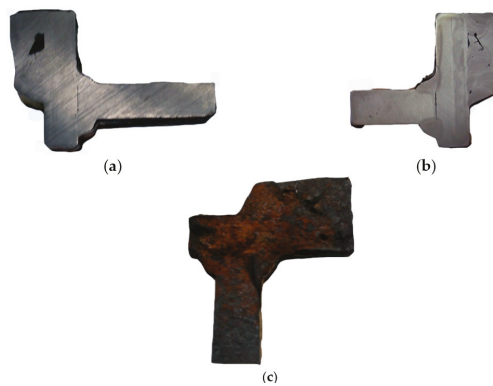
Macroscopic examination (handy-size bulk carrier 30185 DWT): (a) the lateral surface of the bar containing crack I; (b) view of the second side surface of the bar after etching; and (c) fracture surface.
